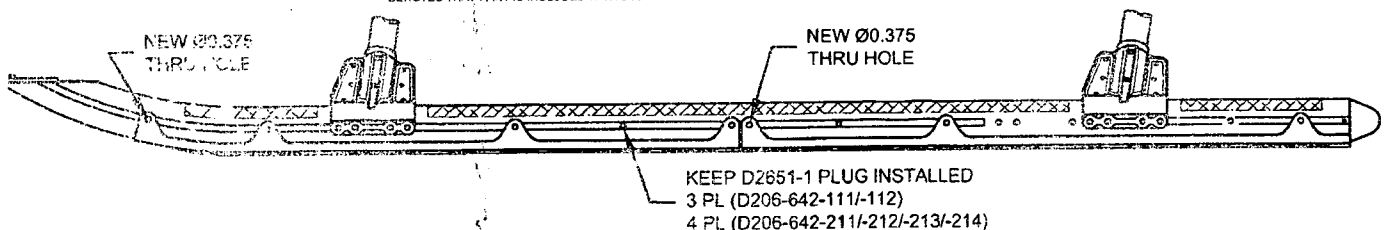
D206-642-111/-112/-211/-212/-213/-214 SKIDTUBE MOD
